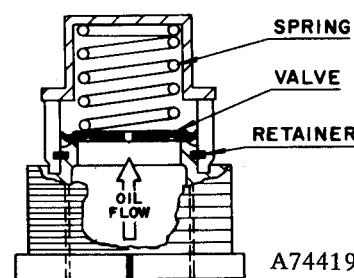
OIL FLOW CONTROL VALVE
